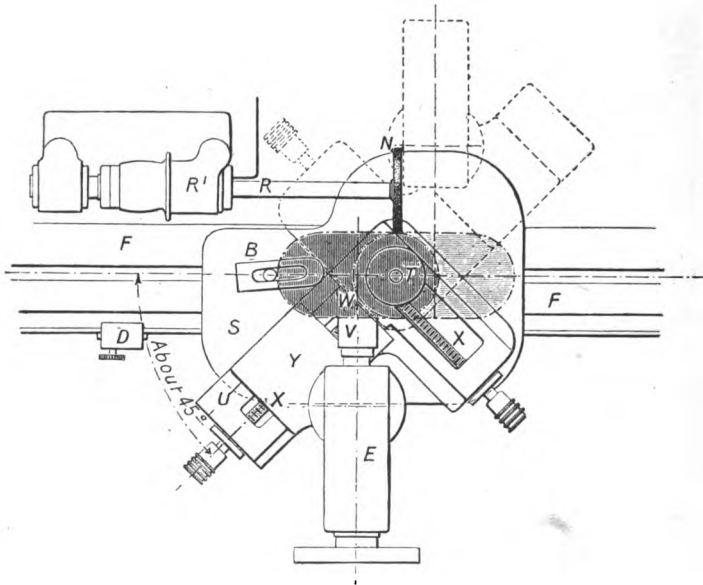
Special Grinding Fixture. Wm. Muir & Co. Ltd.
